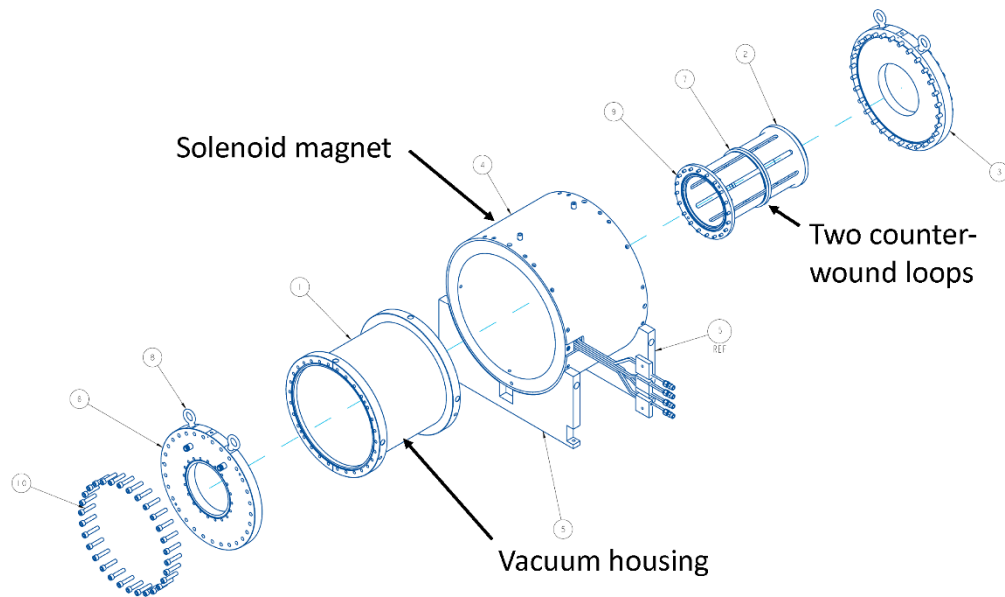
Exploded view of the Diamagnetic Loop apparatus.
